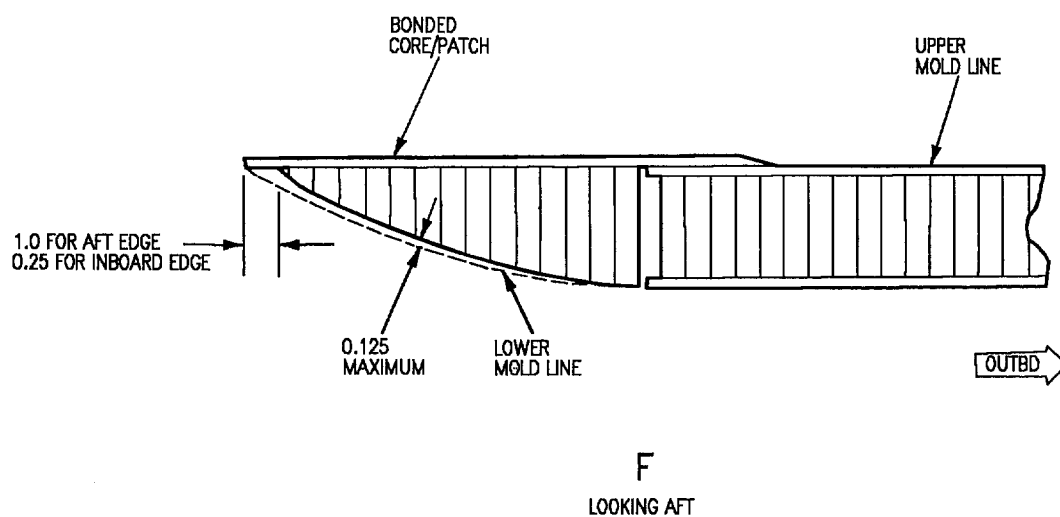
Inboard Aft Corner Repair (Sheet 4)
